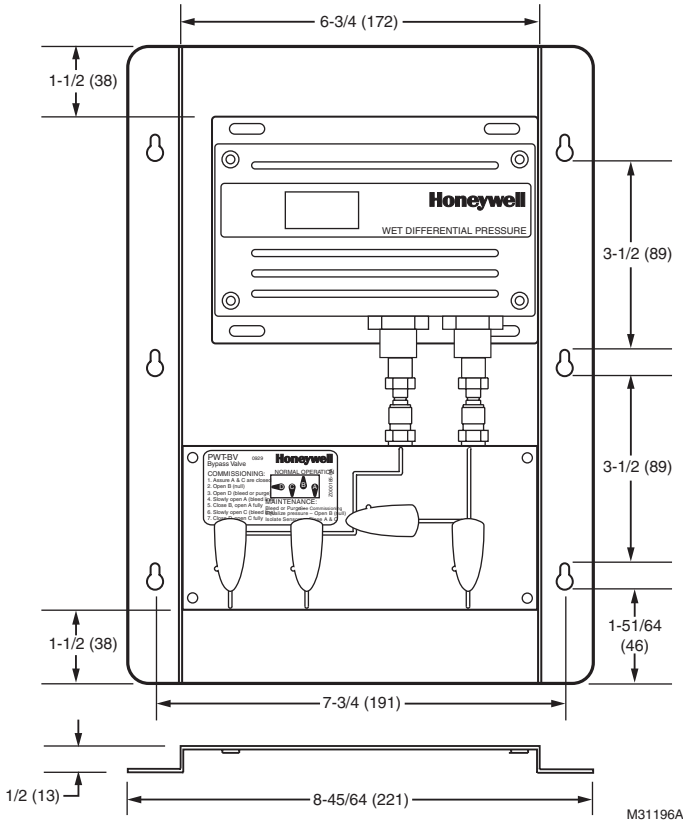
Dimensional Drawing of PWT-BV Bypass Valve Manifold showing PWT (not included) for Reference Only.
